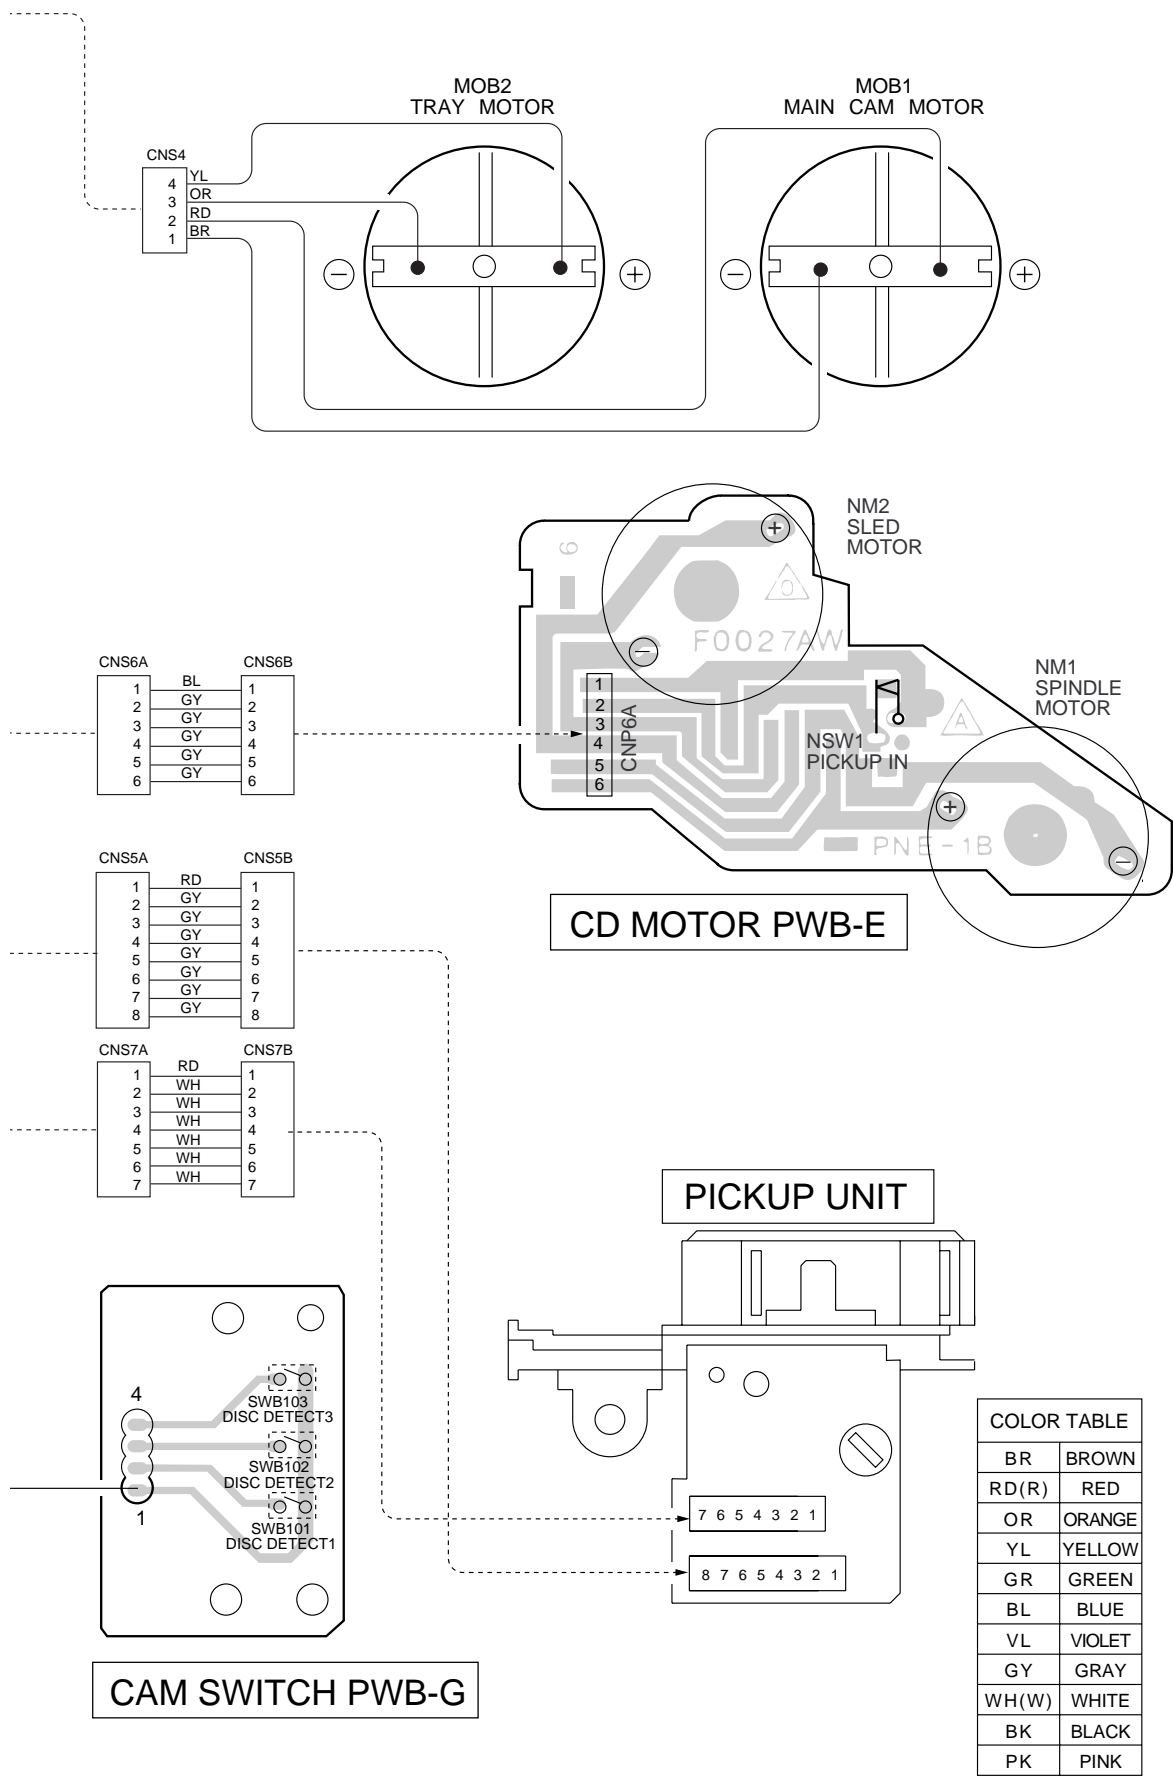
WIRING SIDE OF P.W.BOARD (7/9)
